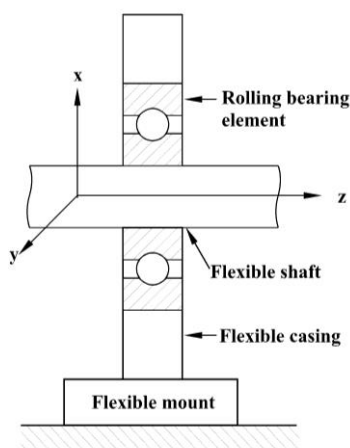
Physical model of mechanical system with rolling element bearing, [8]
